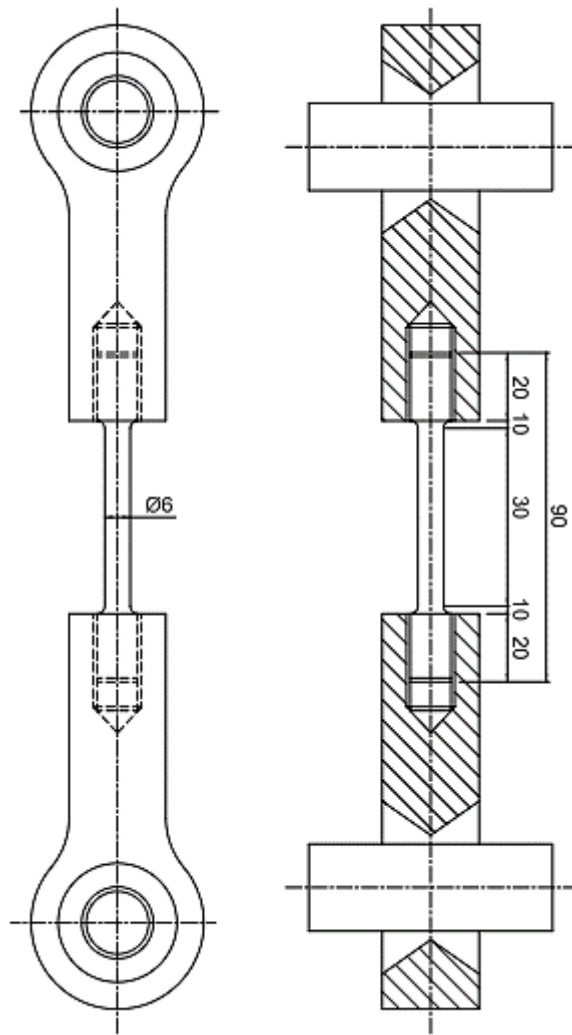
TENSILE TESTS ON BARS FOR PIPES CENTRIFUGALLY CAST IN METAL ON RESIN SAND MOULD
